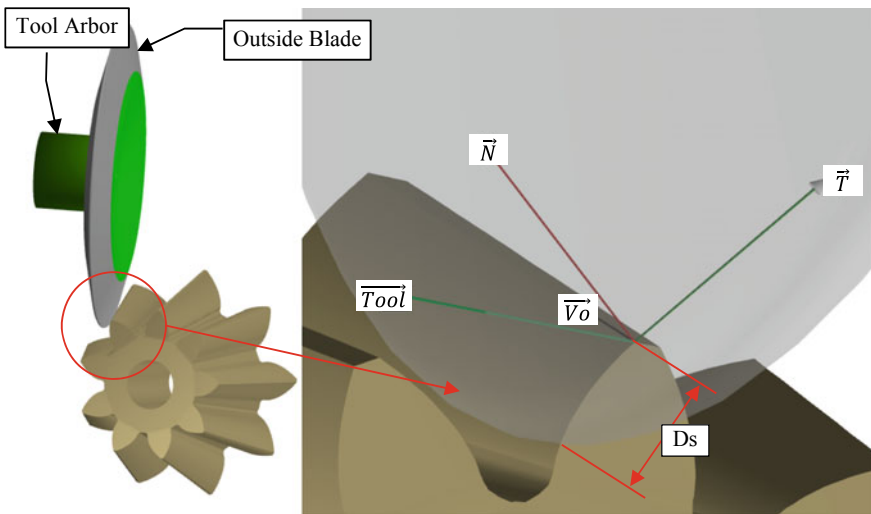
CoSIMT Tool installation for Tip chamfering—spur and straight bevel gears
